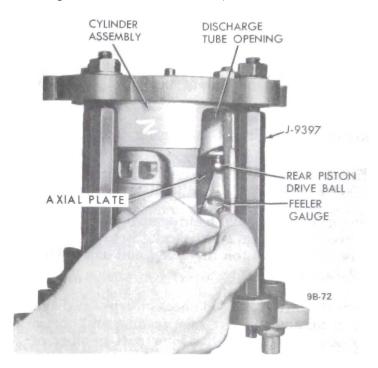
B-82 Checking Clearance Between Rear Piston Drive Ball and Axial Plate
